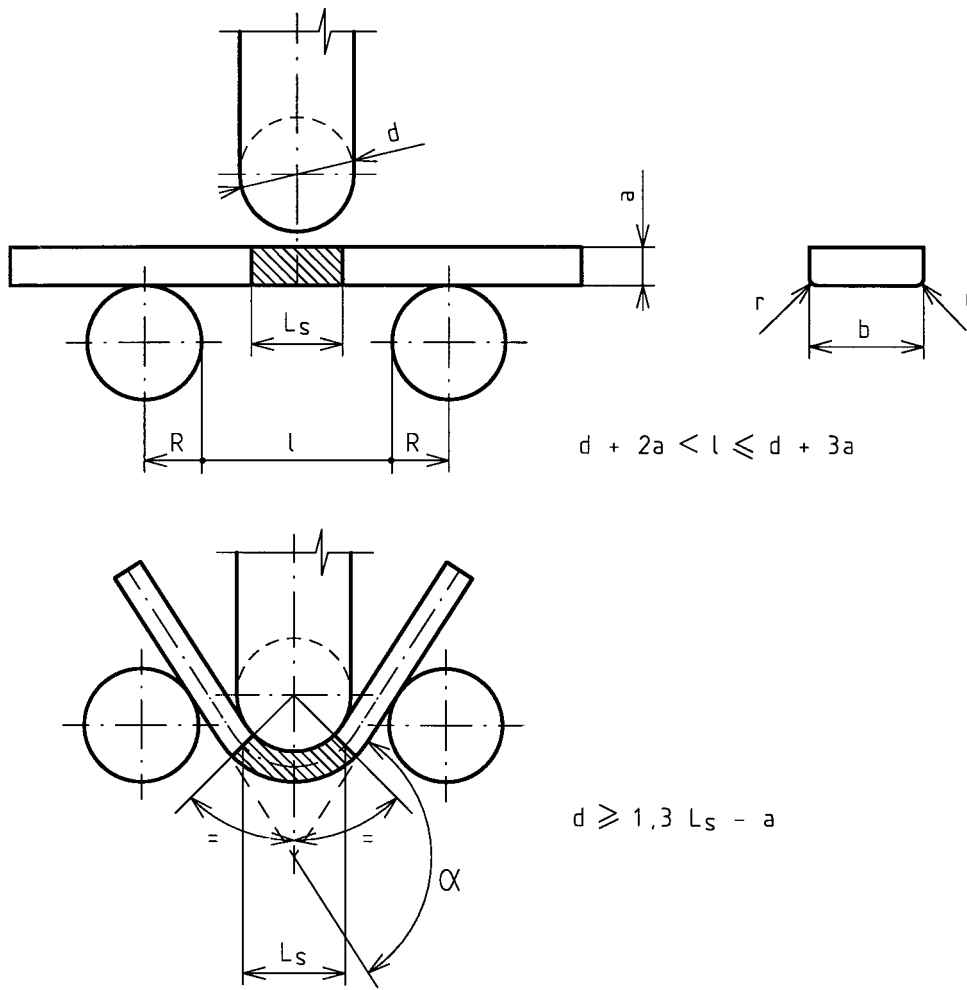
Transverse bend test specimens of cladding with a butt weld (FBCB)
